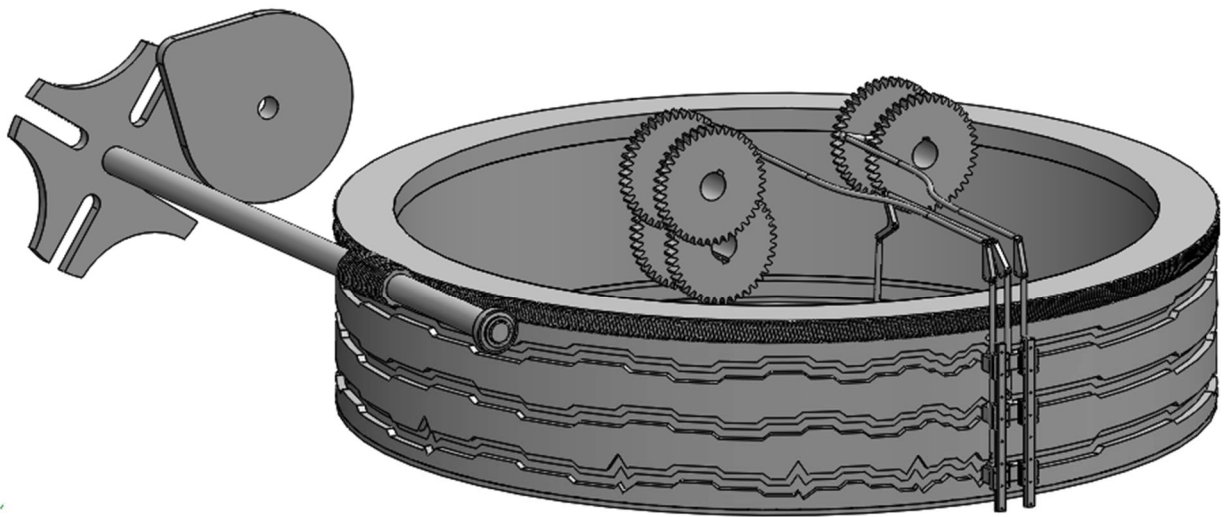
SolidWorks rendering of the rotating barrel cam mechanism, cam tracks, and cam followers connecting to shifting forks.
